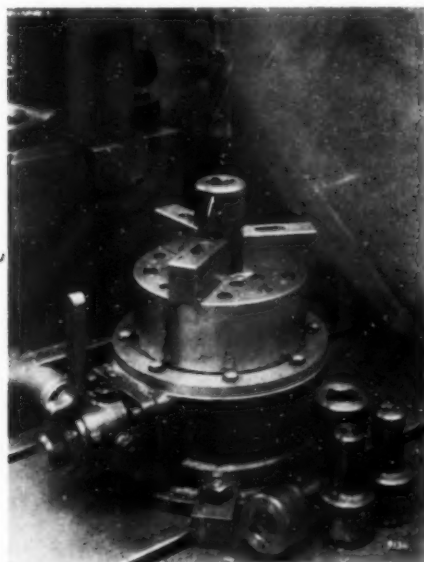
Herbert Air Chuck arranged as a Drilling Fixture.
